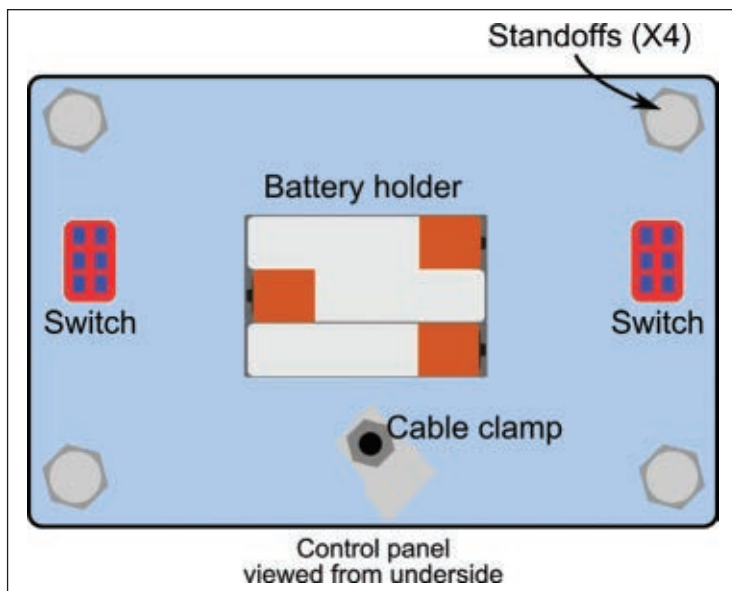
This shows where to mount the switches, battery holder, and other parts on the BeginnerBot control panel.
